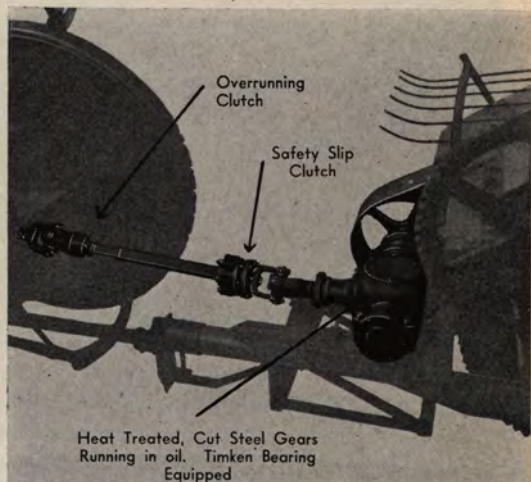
Power Take-Off Gear Case and Universal Joint Assembly.
